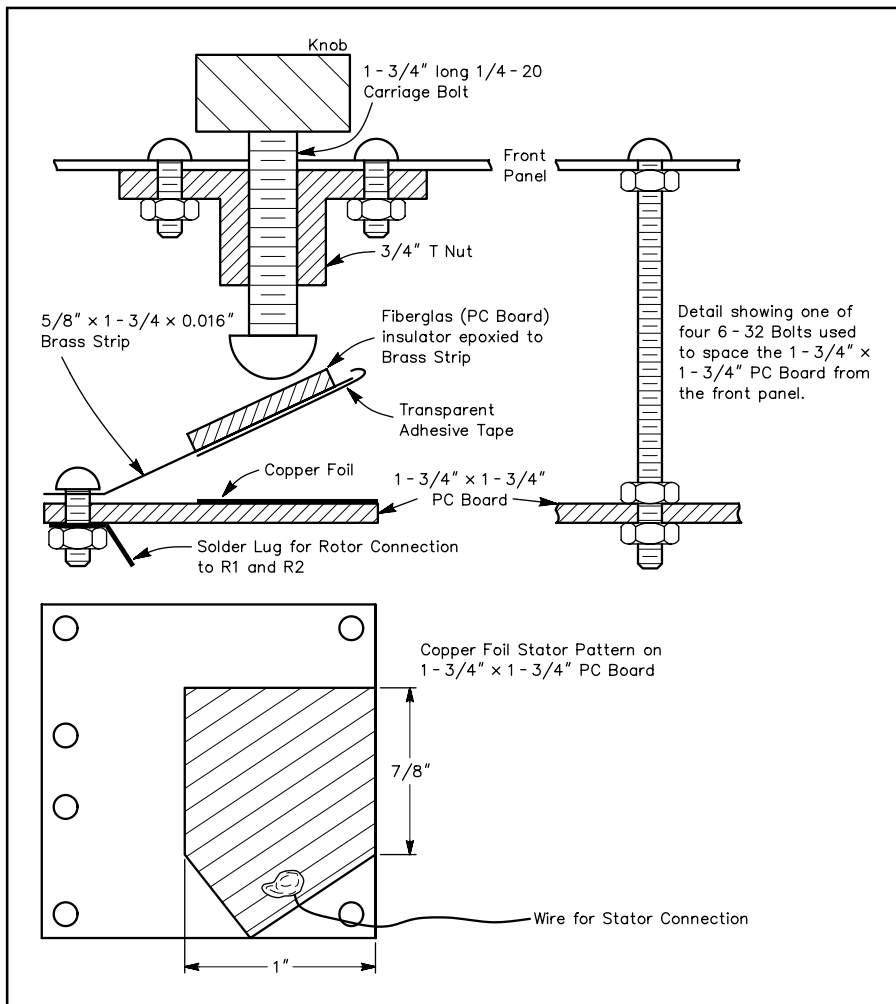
Mechanical assembly of C3; see text and accompanying photographs.
